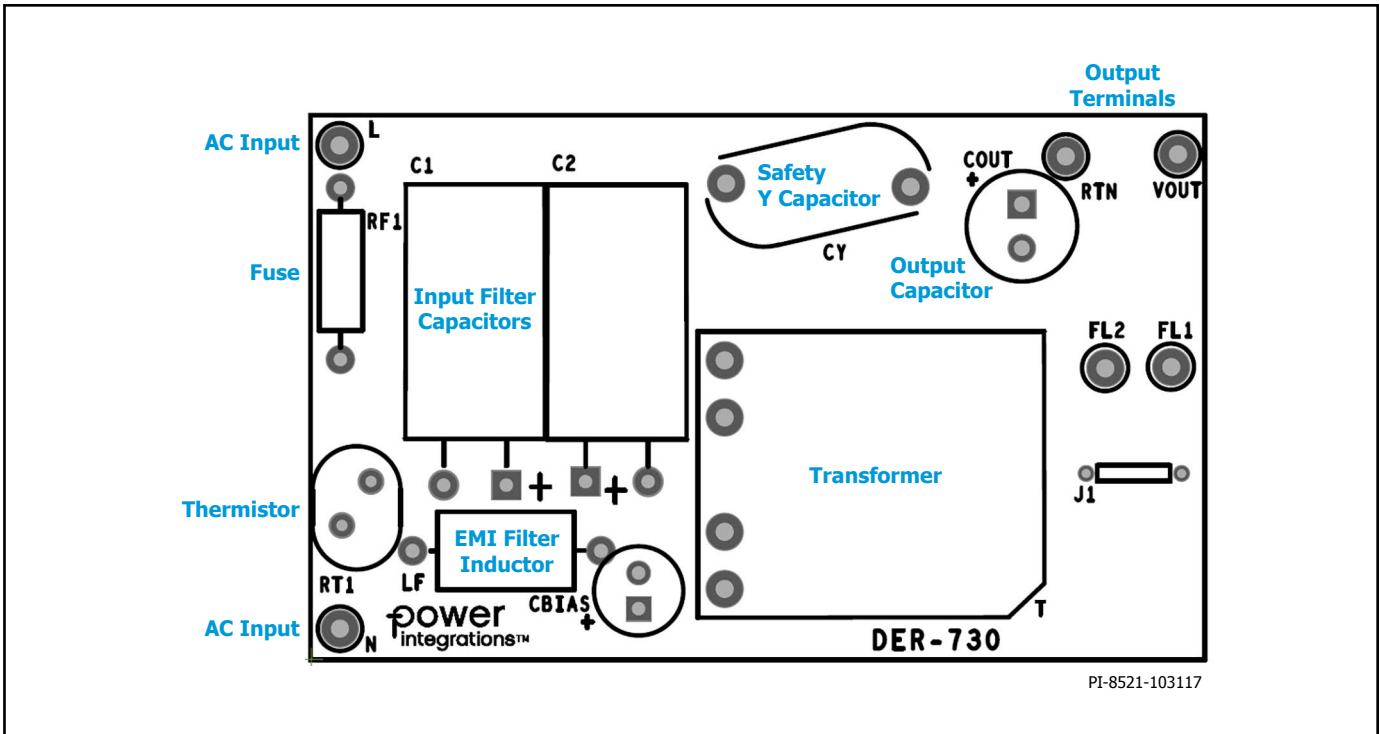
TOP Side – Layout Example Showing Through-Hole Components.
